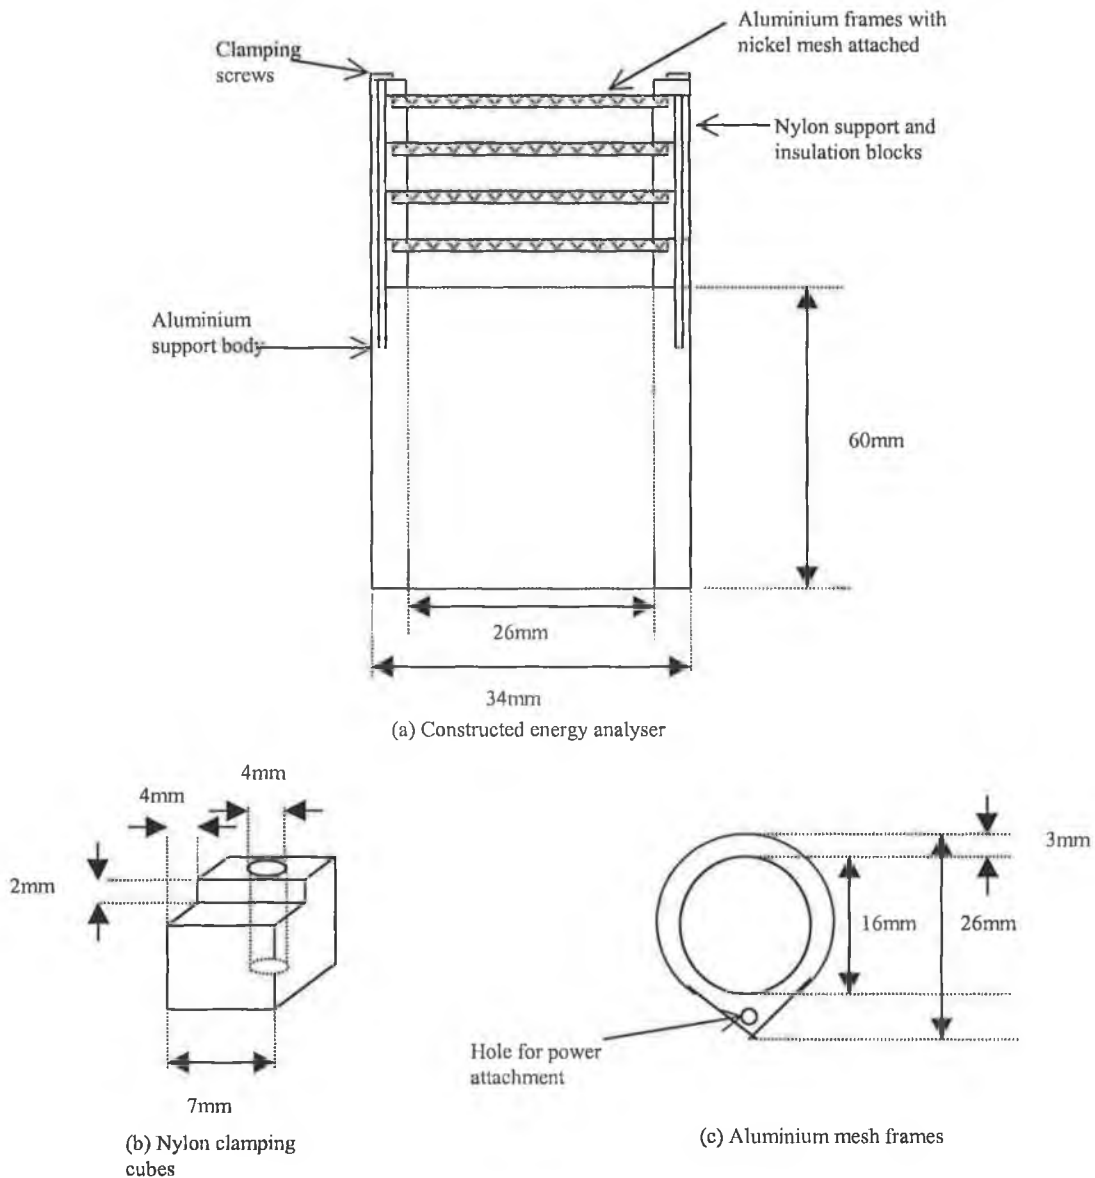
Design of an energy analyser (a) overall schematic of the assembled piece and (b) detail of the insulation and support blocks along with (c) the aluminum machined mesh frames.
